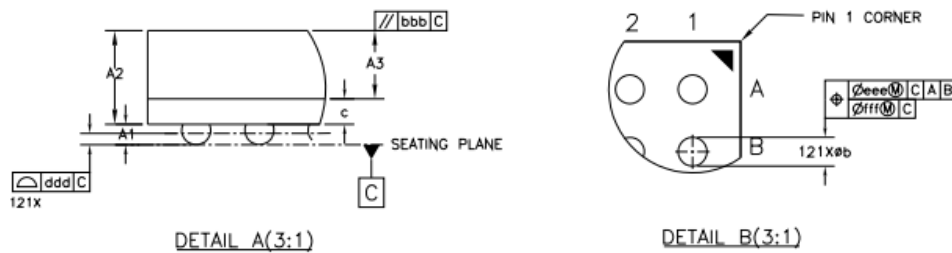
RKNanoD-G LFBGA121 Package DETAIL A & B
